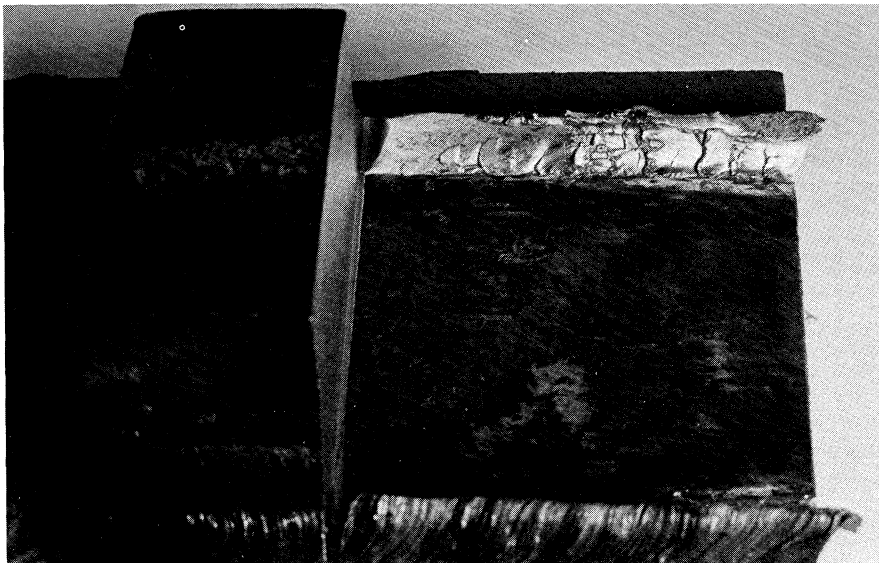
Failure surface of longitudinal fillet weld
